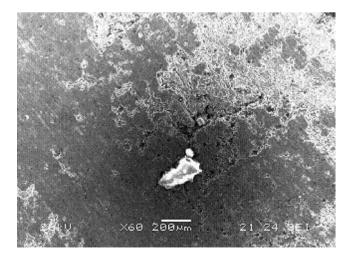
SEM image of the surface of drilled hole (speed 160 rpm/feed 0.2 mm/rev, ×60)
